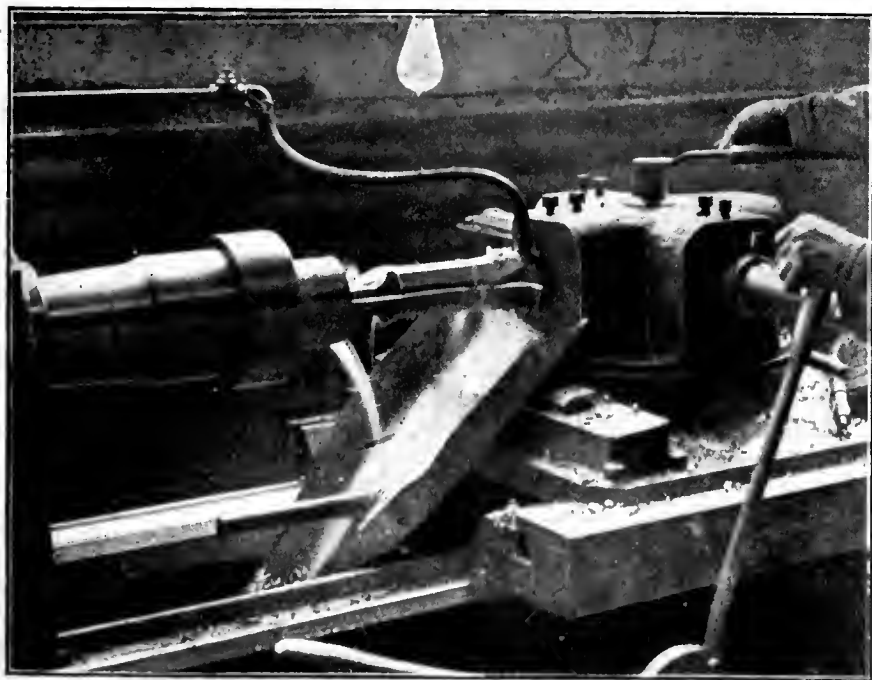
BORING 4.5 SHELLS ON 26 IN. BOYE & EMMES LATHE
